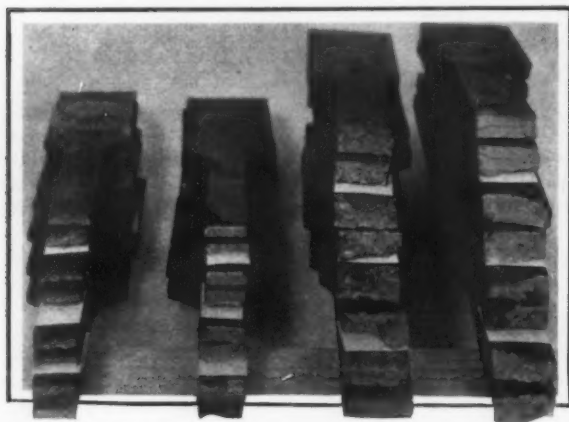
Welded Tensile Specimens After Rupture, Chrome-Vanadium Steel Sheet
